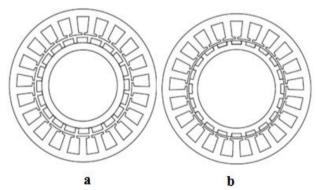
PMM with surface magnets (a) and inset magnets (b)
